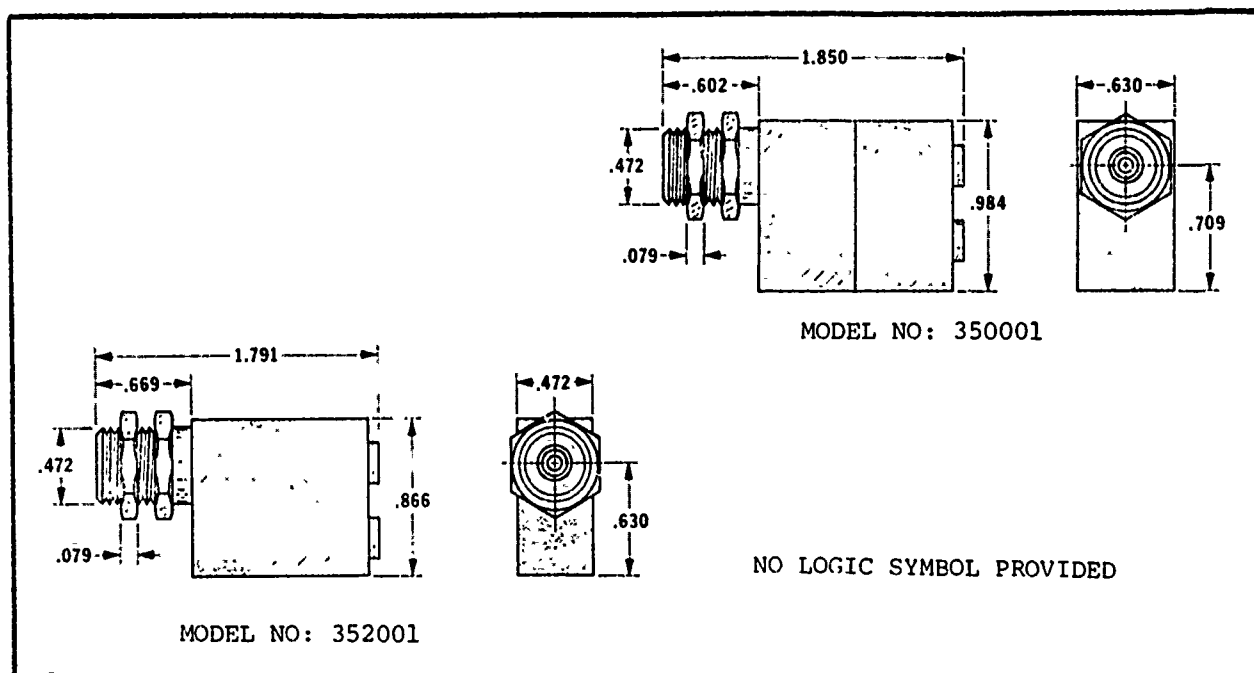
CONE JET SENSOR-MILLER FLUID POWER
